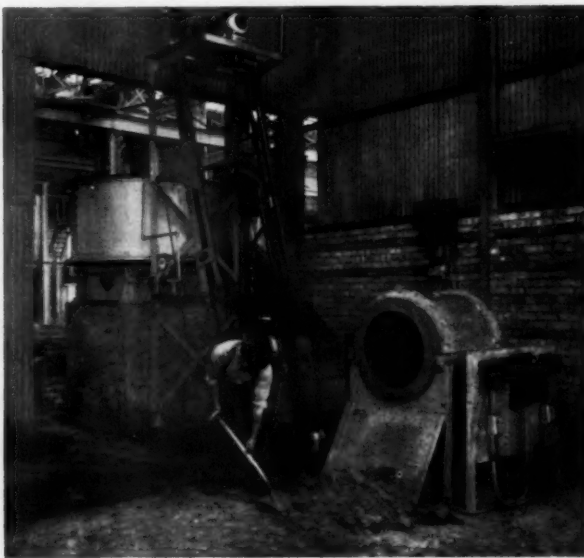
Machine for conditioning backing sand and delivering it in a heap near the moulding machines [Courtesy Pneulec Ltd.]
